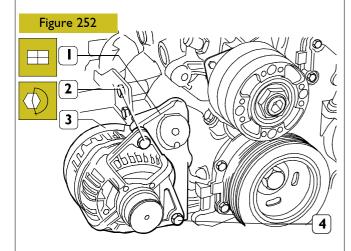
I VECCO 3 4 544017 Replacement of alternator free wheel Figure 25 I Figure 25 I
